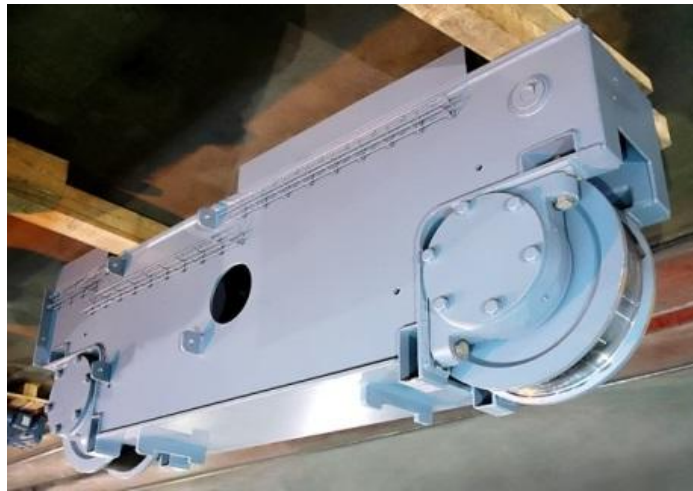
Attachment of axle boxes with running wheels to the end beams of a double-girder overhead crane (photo by the authors)
